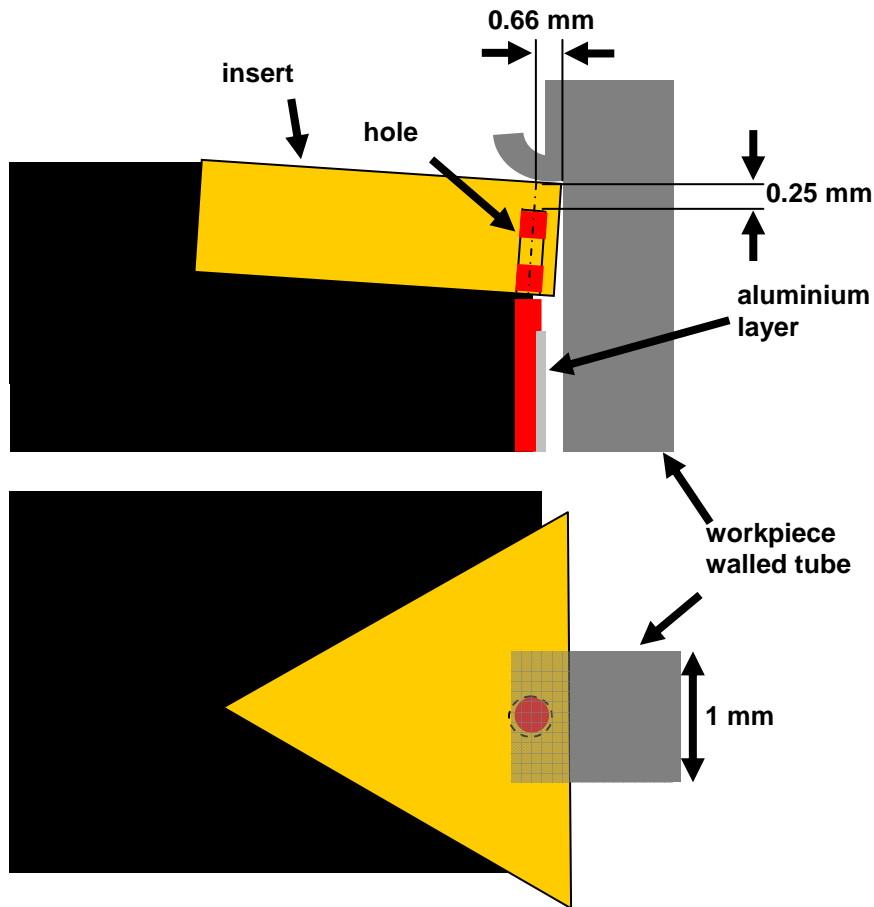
quoted sketch of the embedded thermocouple, lateral view (top part of the sketch) and top view (bottom part of the sketch)
